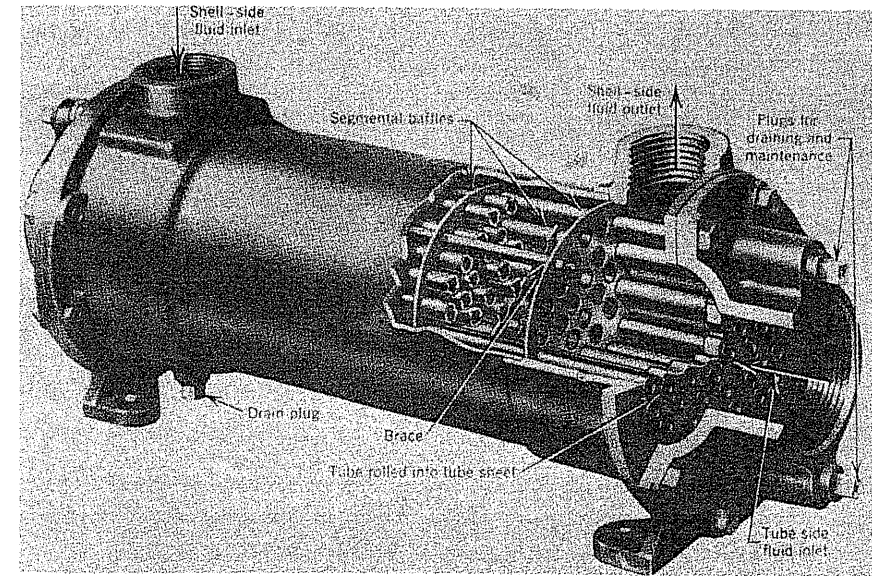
Cutaway view of a single-pass shell-and-tube exchanger [Brown et al., 15-4, courtesy John Wiley & Sons, Inc.].
